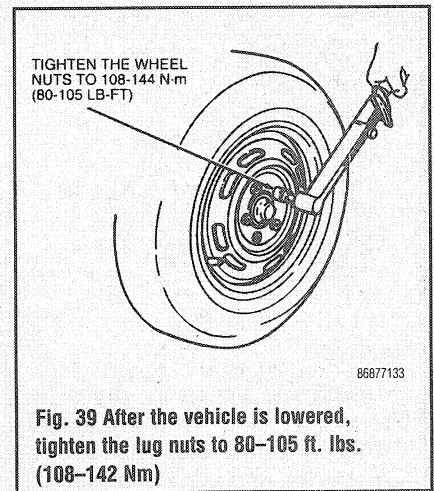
After the vehicle is lowered, tighten the lug nuts to 80–105 ft. lbs. (108–142 Nm)
